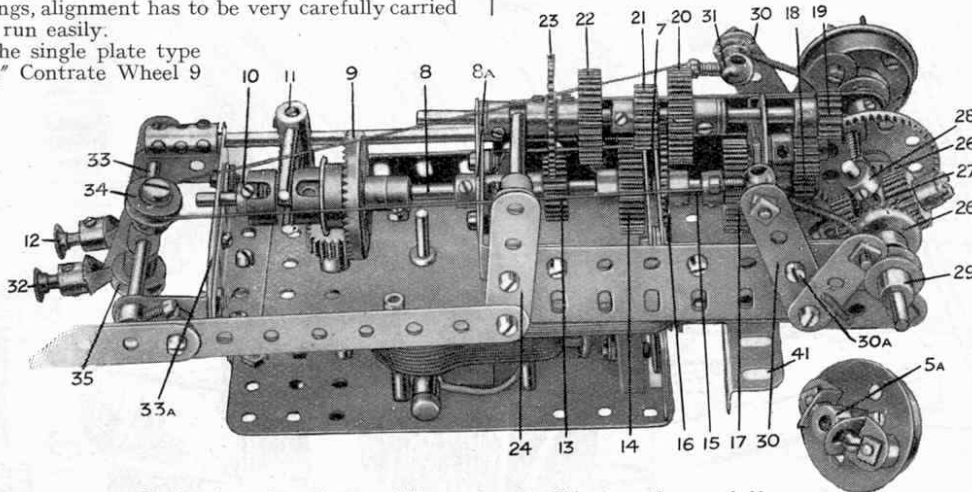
An underneath view of the power unit. This shows the remarkable compact appearance of the clutch, gear-box, differential, etc.
